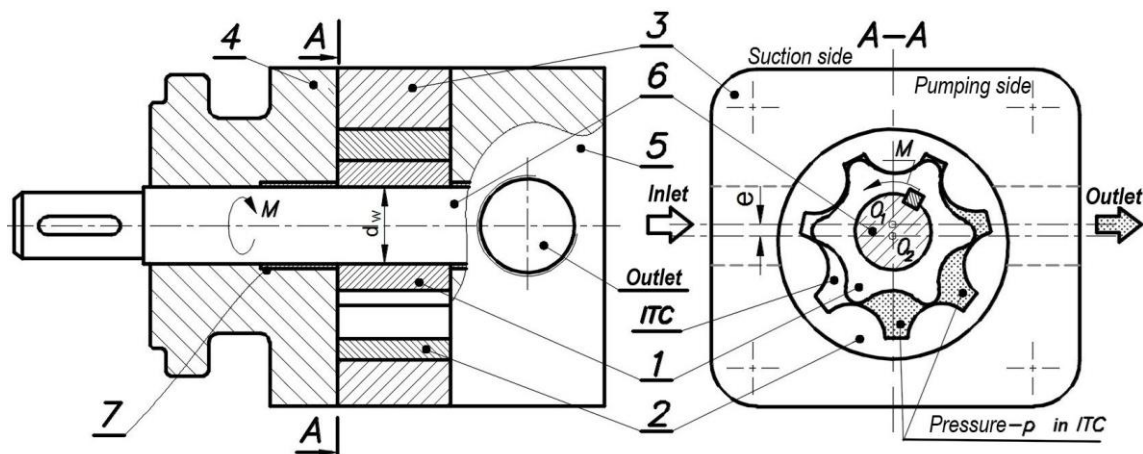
Design and principle of operation of a hydraulic gerotor machine
